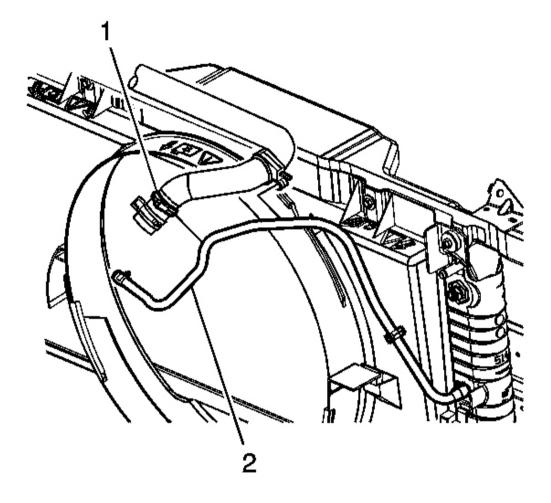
Radiator Vent Inlet Hose Courtesy of GENERAL MOTORS CORP.
